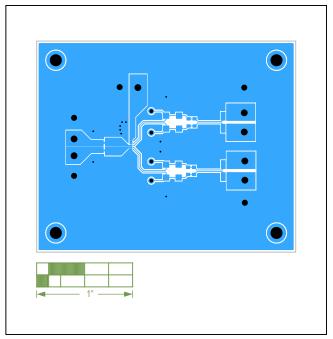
MAX44285 EV Kit PCB Layout—Component Side
